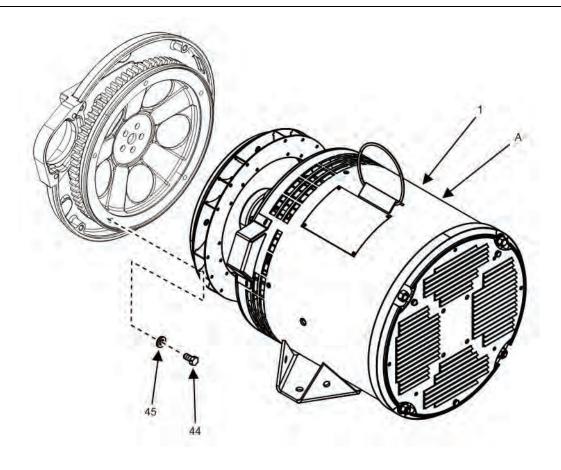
AC Generator Assembly, 50/60 Hz (Sheet 1 of 4).
